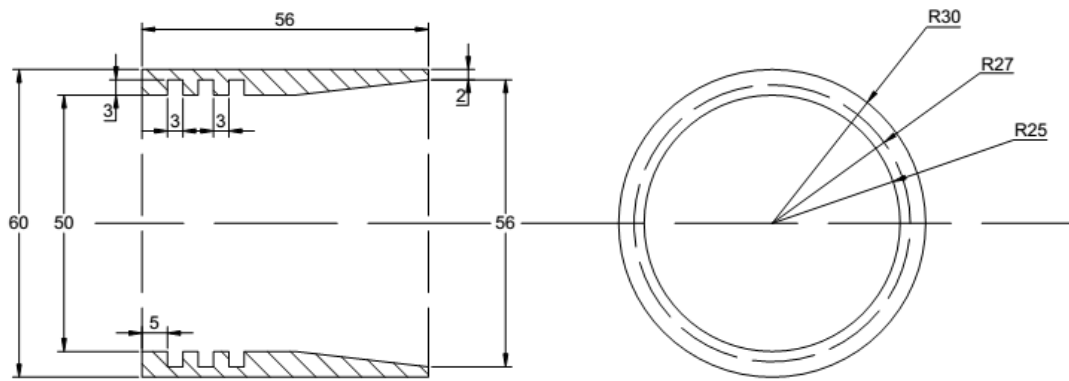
Model I : Exposed electrode placement assembly (Sectional view)
